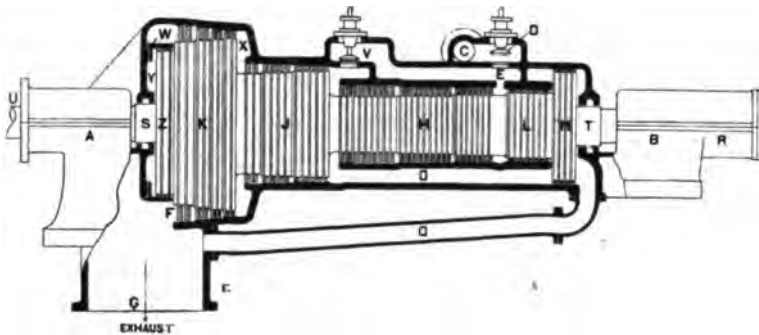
Longitudinal Section through Allis-Chalmers Steam Turbine.
